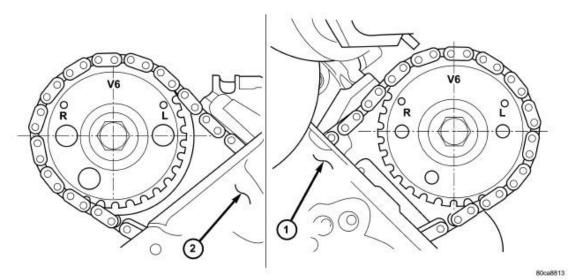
CAMSHAFT SPROCKET V6 MARKS (#1 TDC, Exhaust stroke)
